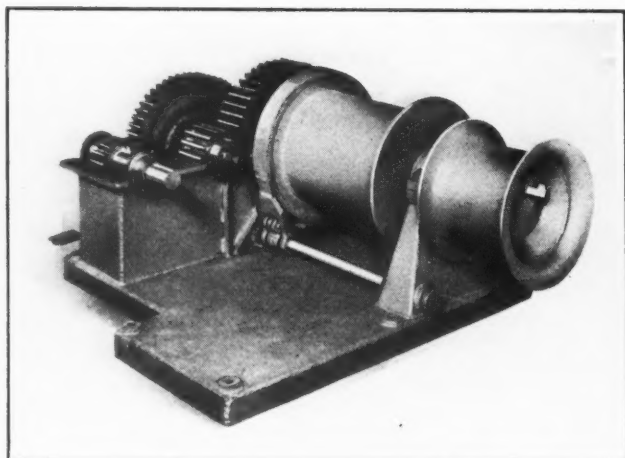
Winch Constructed Principally of Parts Cut to Shape and Welded Together
